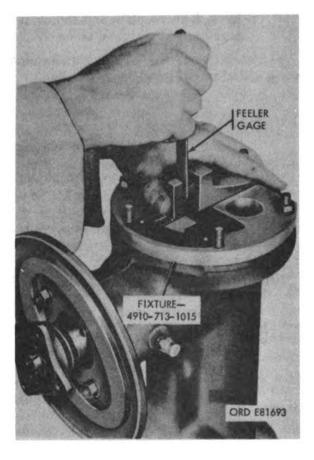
Checking depth of drive pinion using fixture—4910-718-1015.
